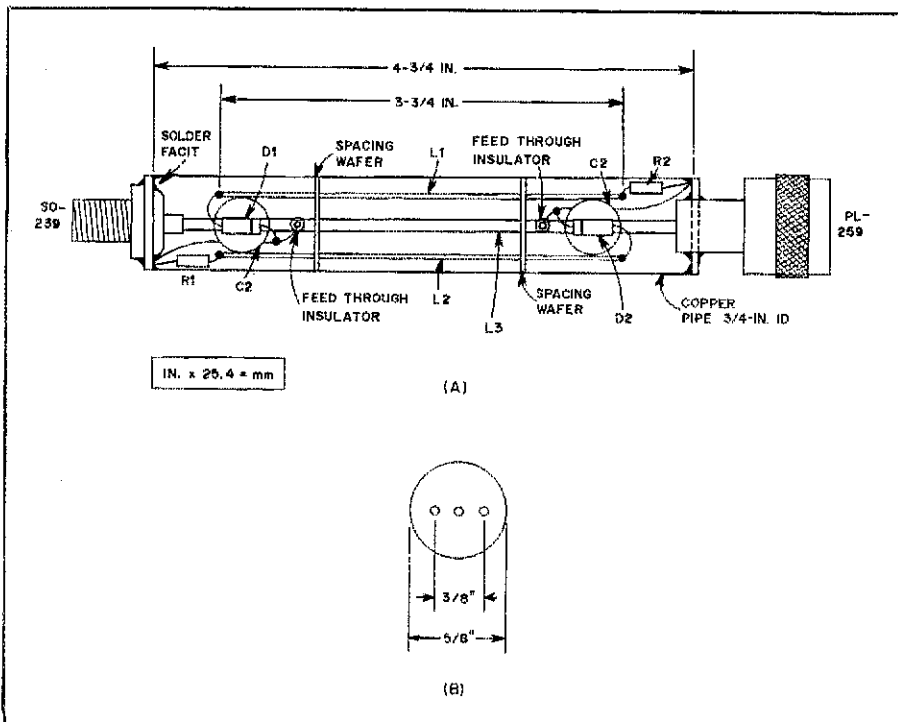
At A, a cutaway view of the pickup unit constructed from a piece of copper pipe. The insulating wafers used to support the conductors are cut to the dimensions shown at B.
